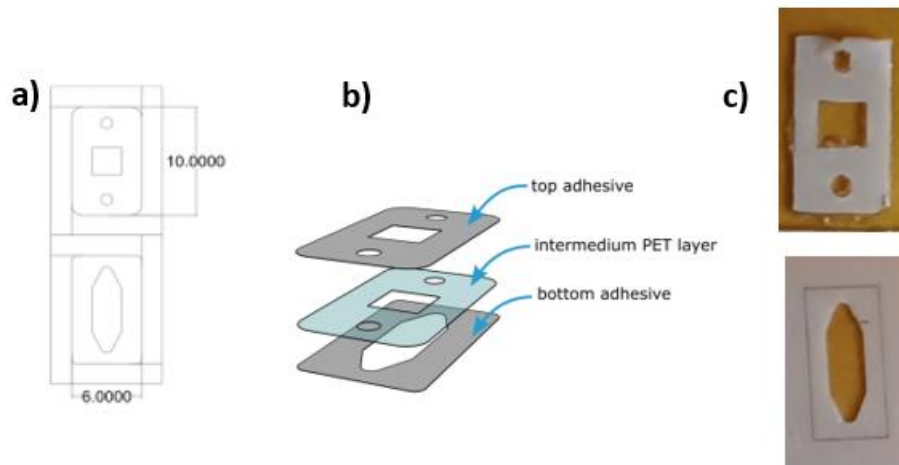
a) CAD design in micrometer b) Adhesive microfluidics assembly process [3] c) Final products after removal of unnecessary adhesive.
